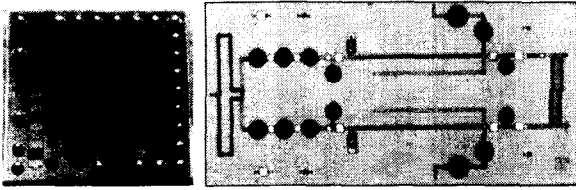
Examples of RF-MCM-D modules. Left: RF-section of a wireless front-end circuit showing a flip chip RF-chip on an glass RF-MCM-D substrate with 300 μm solder balls (CSP) for mounting on a PCB board (size = 7x7 mm); Right: Sub harmonic QPSK modulator at 7/14 GHz (size=8x17 mm). [16]
